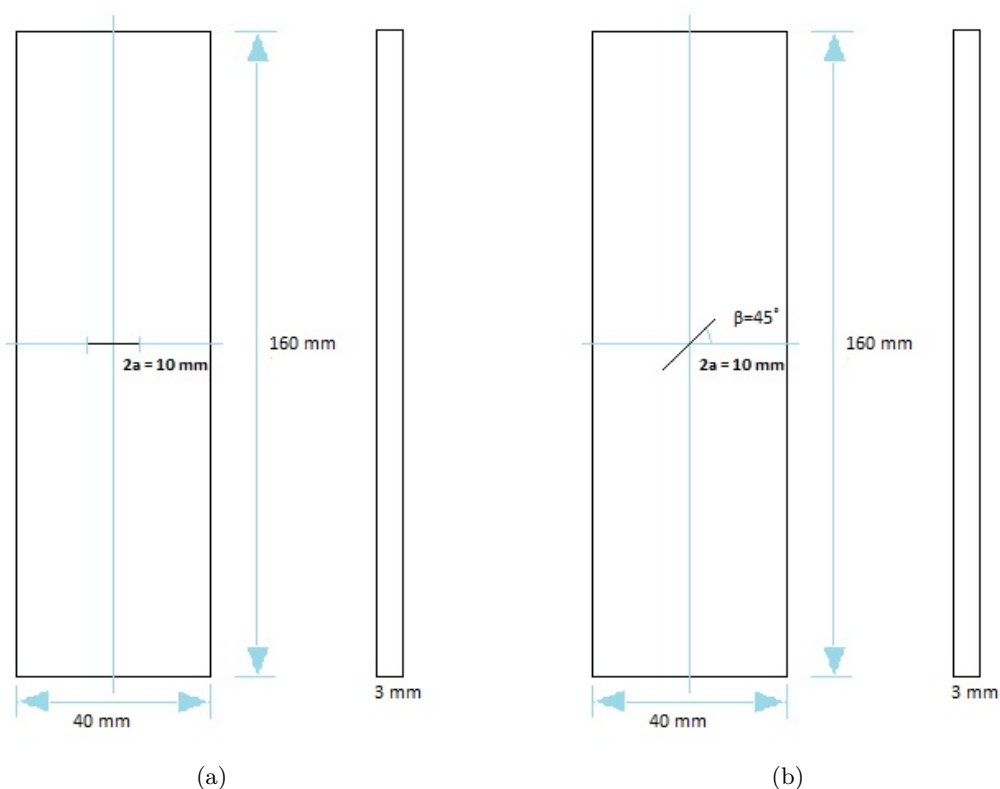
Geometry of basic models that are used in FEA. (a): Straight Center Cracked Specimen; (b): Center Slant Cracked Specimen
